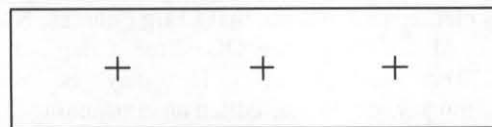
Sample drilling template. Make with any drawing program and print out actual size.
